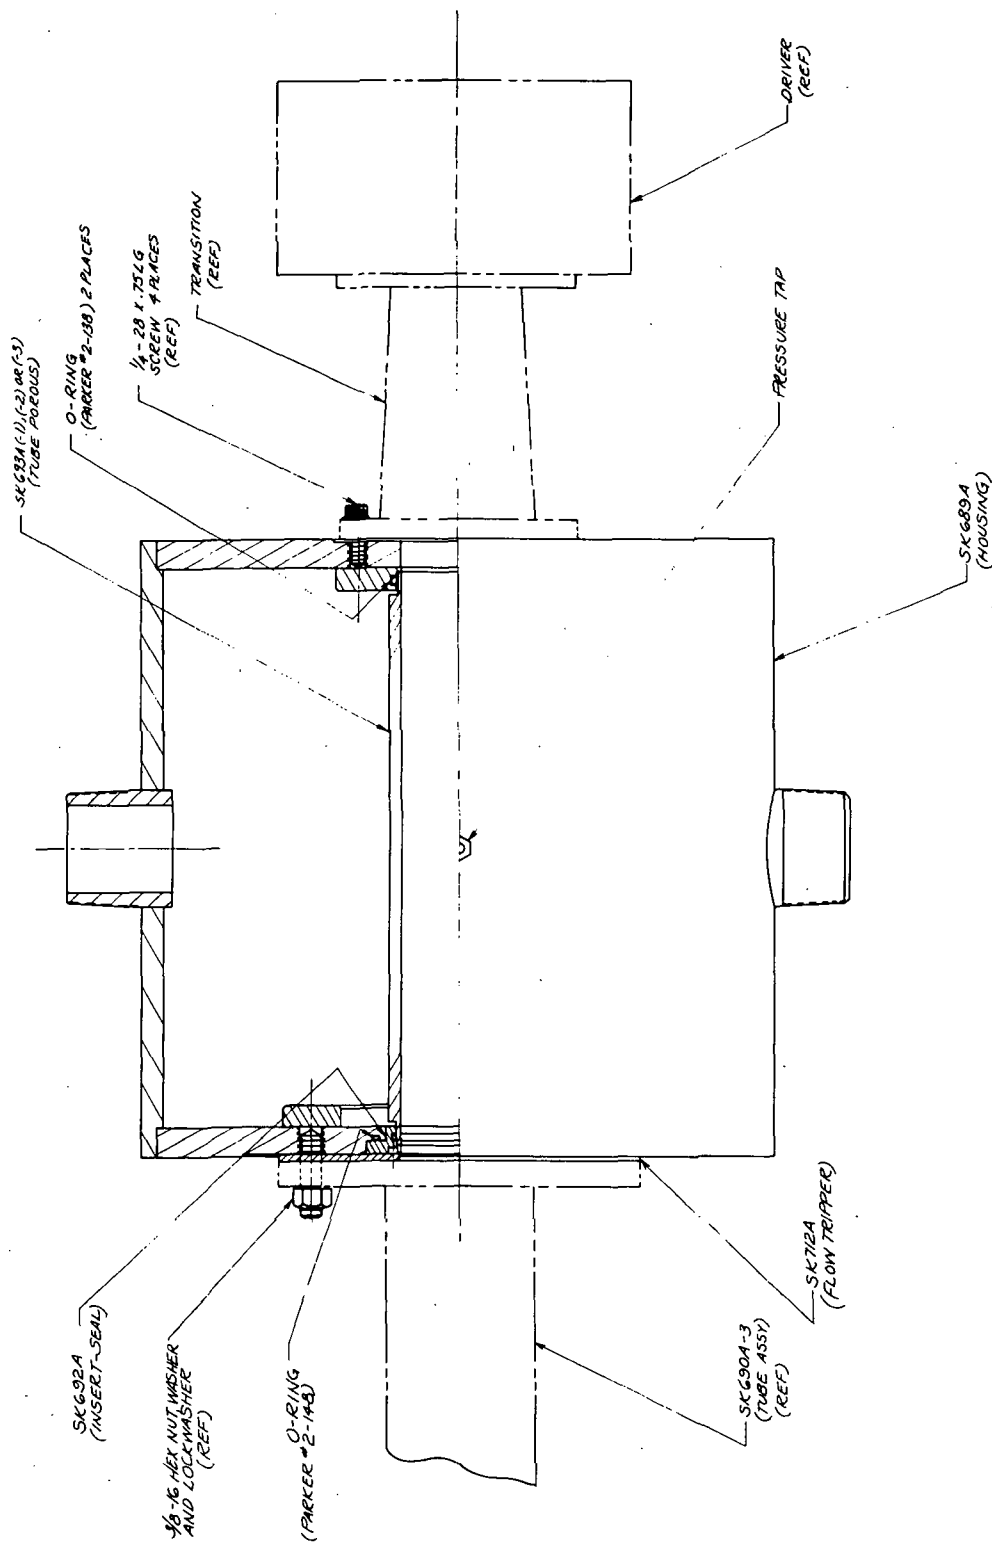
DWG. NO. D-11517 AIR SOUND INTERMIXING SECTION ASSY
